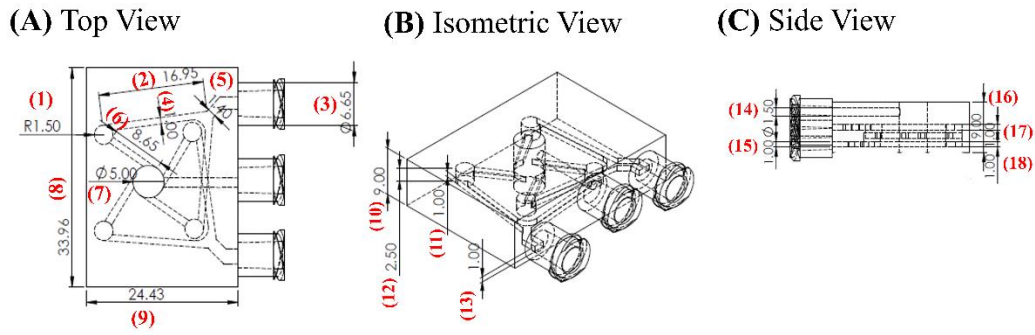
(A) Top view, (B) isometric view, and (C) side view of the merged-inlet single well with dimensions marked.
